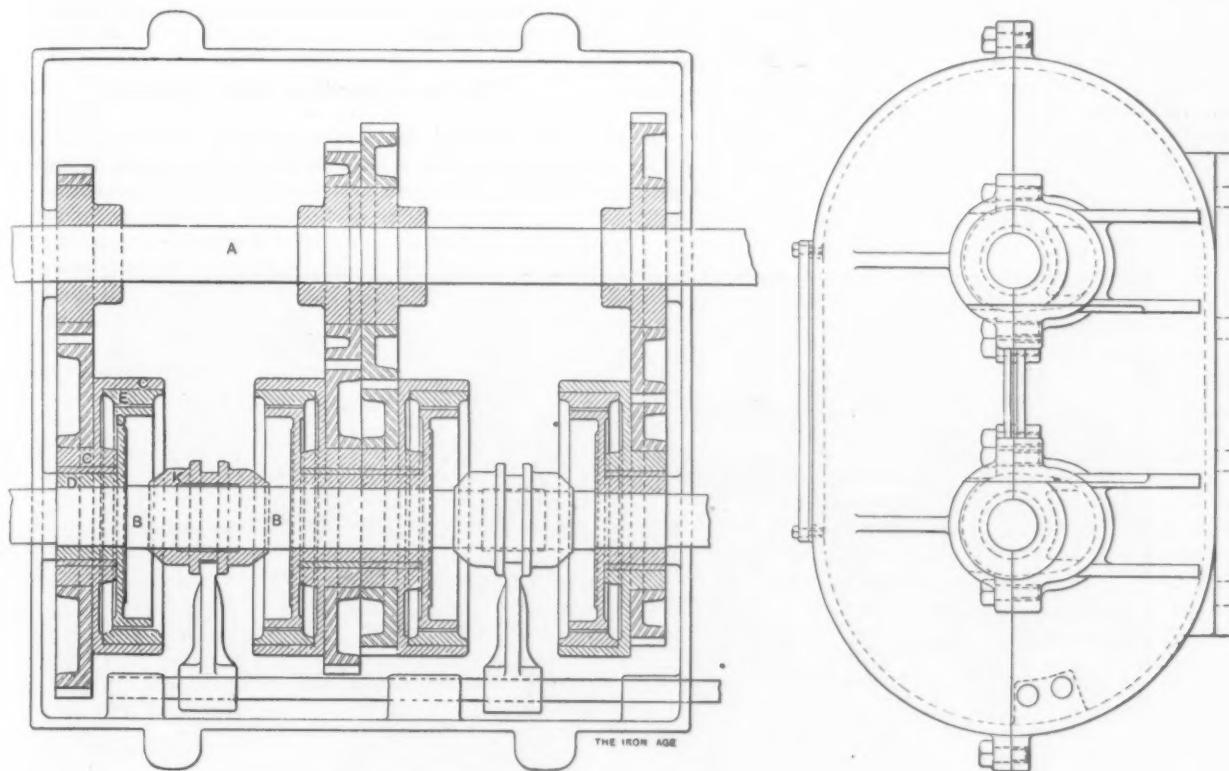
Section and End Elevation of the Flather Four-Speed Planer Driving Device.
